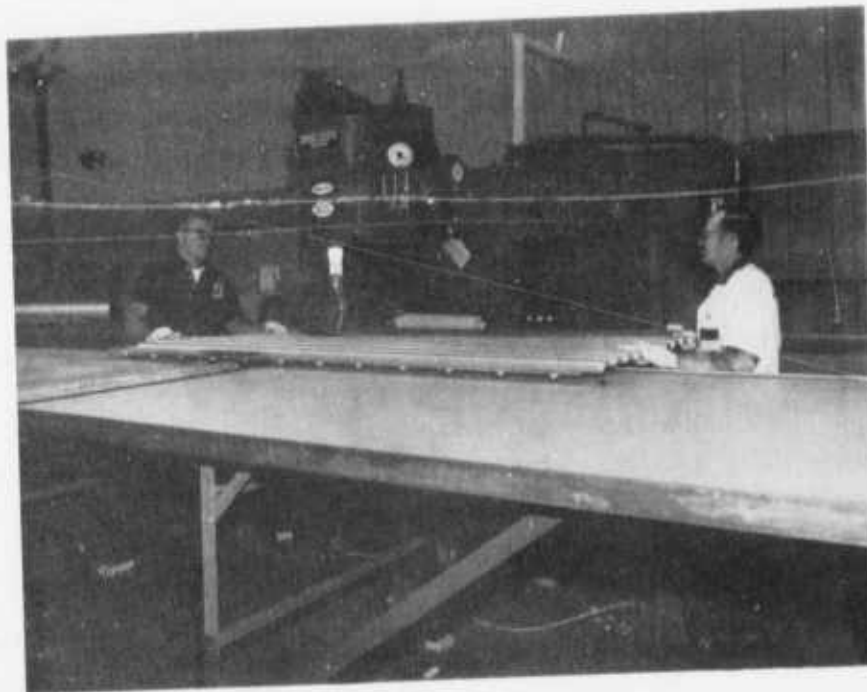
SCIAKY ROLL SPOT WELDER SHOWN WITH BALL TRANSFER
